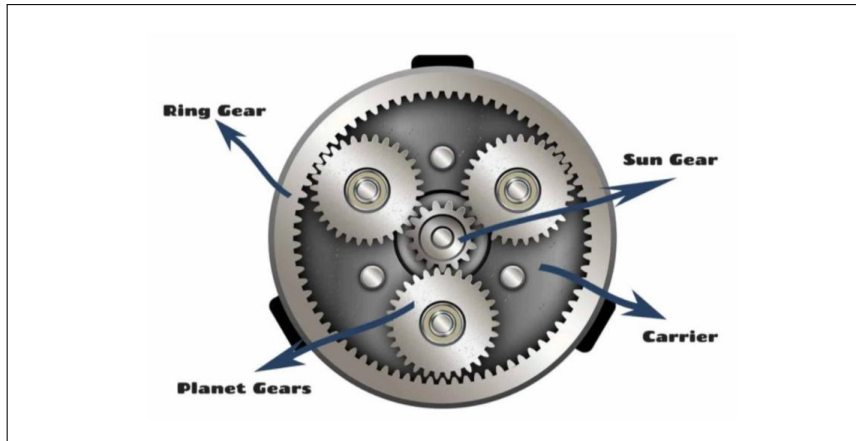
Placeholder – Diagram of a Planetary Gear Motor showing sun gear, planet gears, and ring gear arrangement.
